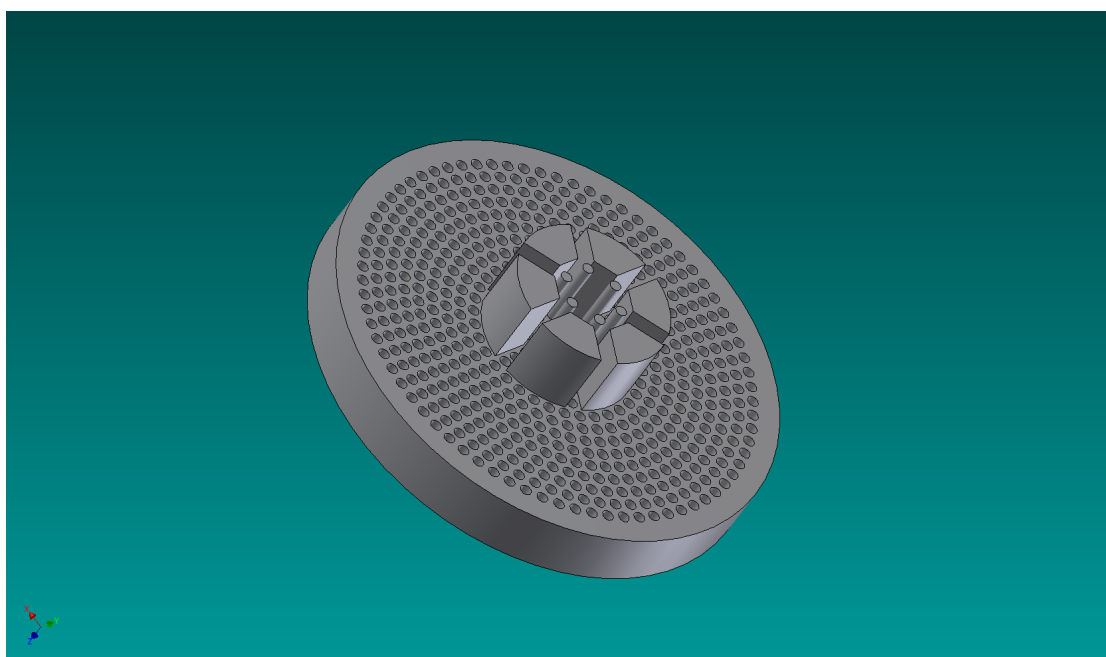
The die design for the sieve plate, which consists of six cylindrical pins for the inner holes and six wedge shaped pins for the outer holes.
